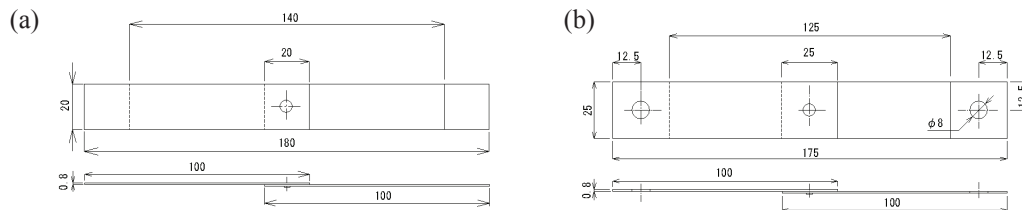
Geometry of the specimens for (a) static tensile shear test and (b) fatigue test.
